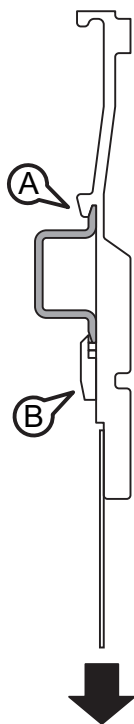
Side view of a DIN rail (shown in gray) with an adapter plate fitted
